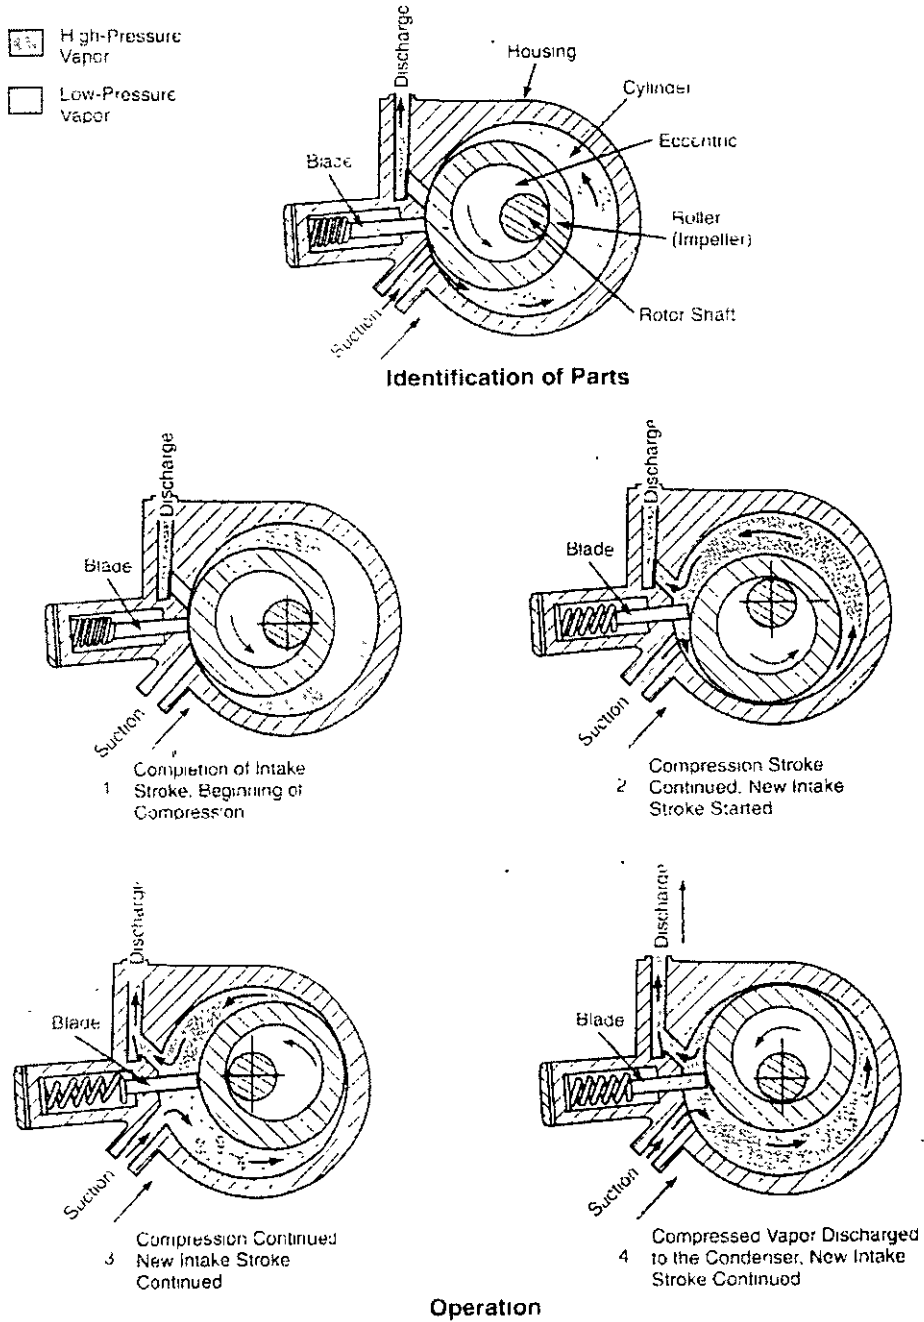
Rotary compressor. Stationary blade or divider block is in contact with an impeller.
